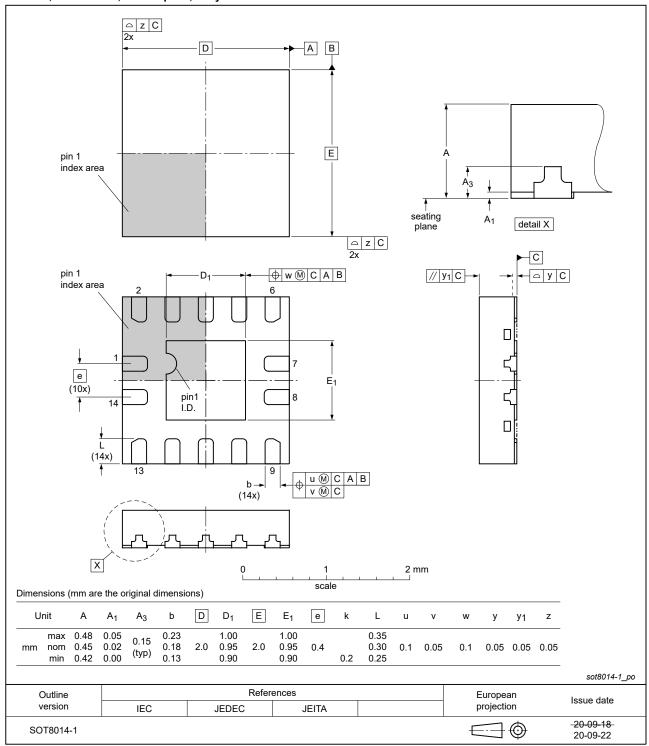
Package outline SOT8014-1 (DHXQFN14)
